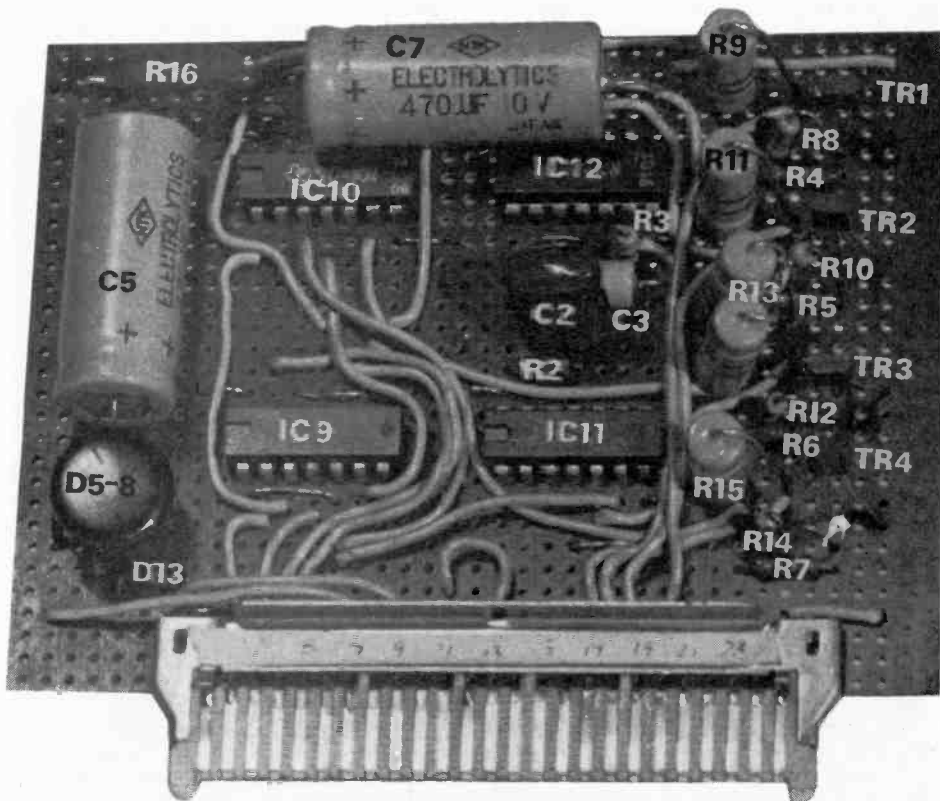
Board B carries the 5V power supply components, triac drivers, and output gating circuits
